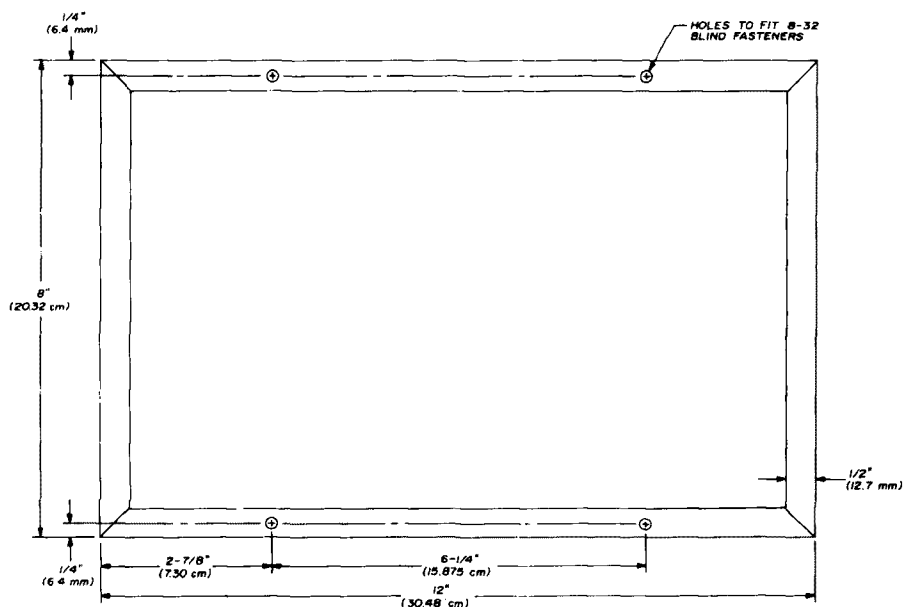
Top view of the upper chassis showing the top plate mounting holes. All holes are drilled to fit 8-32 (M4) blind fasteners.
